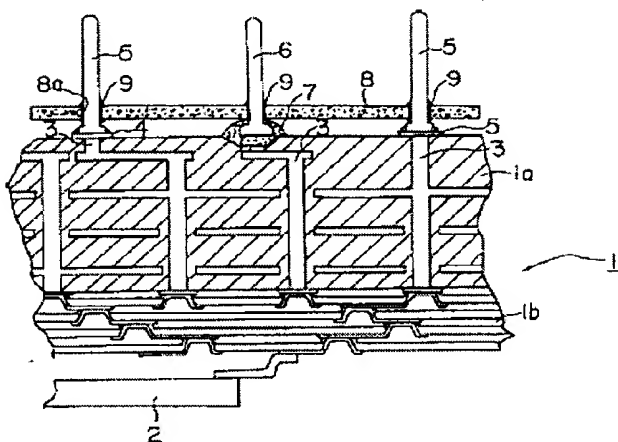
It is a side view explaining the breakage state of an I/O pin.
